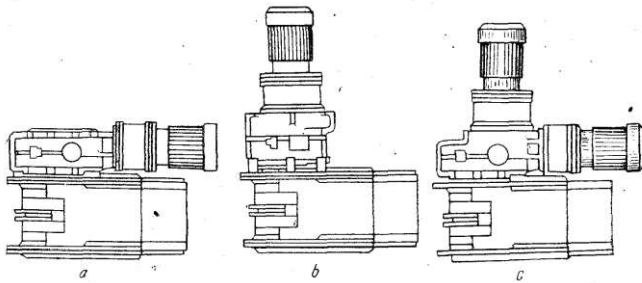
Assembly and action groups: a-with the engine placed parallel to the carrier; b-with the engine placed perpendicular to the conveyor; c-with two motors (one parallel and one perpendicular to the).
